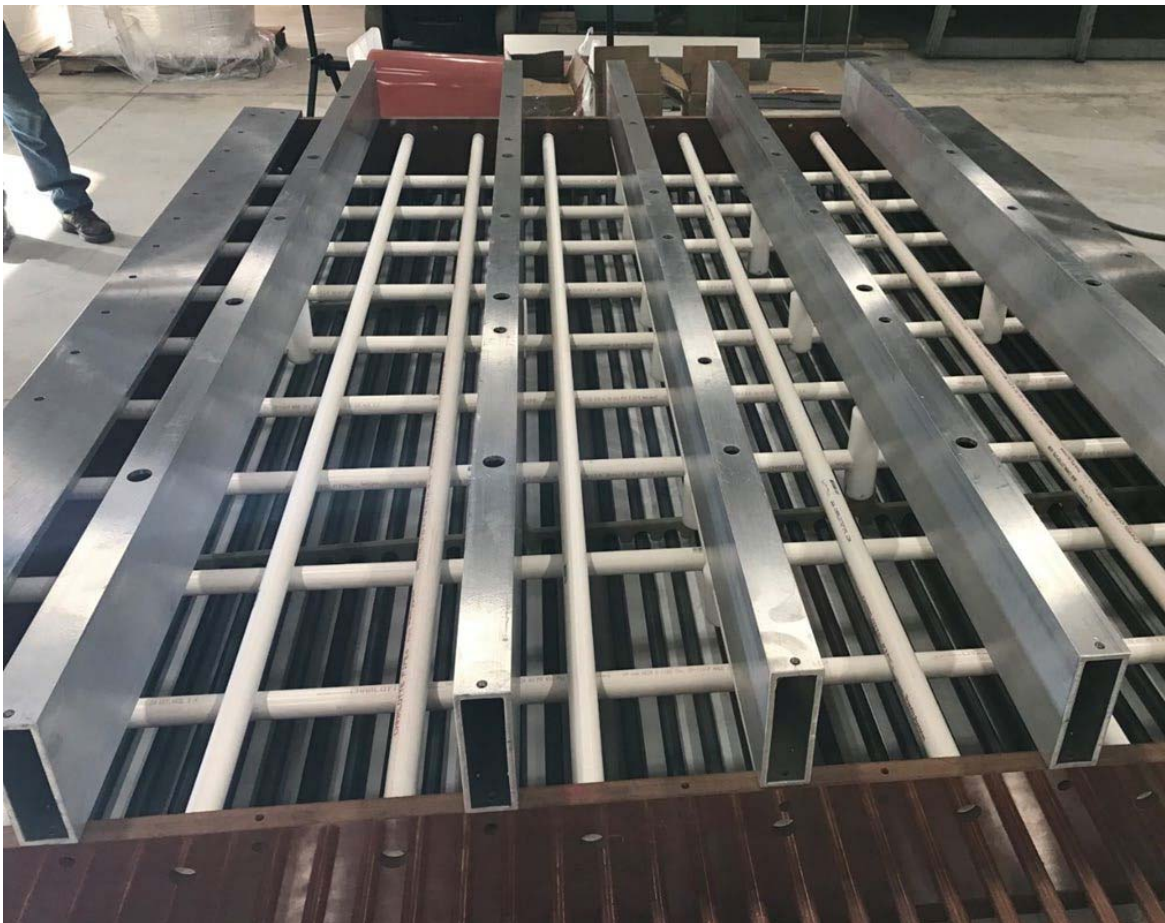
Picture of a section of the tool being prepared for casting (front view)
